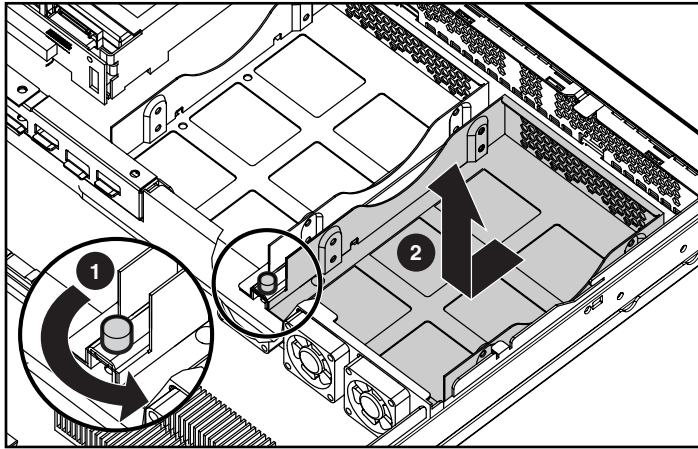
Removing the hard drive tray for SCSI ID 0
